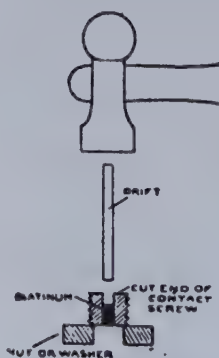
Re-fitting the Platinum Contact (It is best to buy these from maker of coil.)
